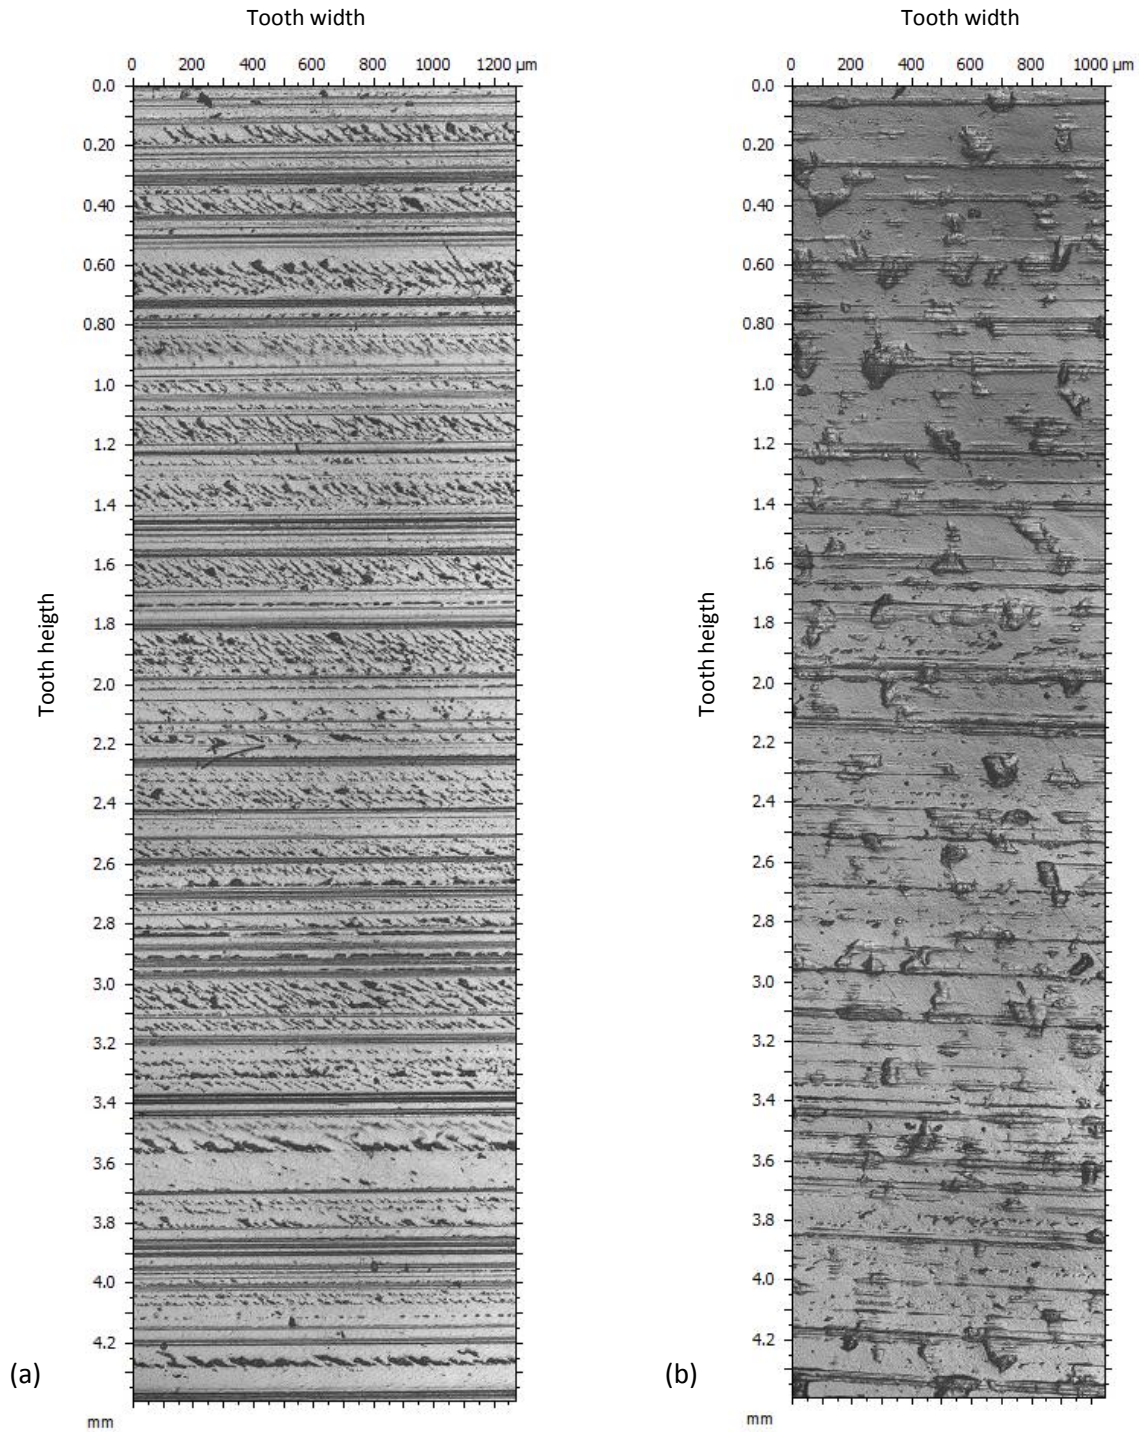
View of tooth surface roughness of (a) crown gear and (b) pinion
